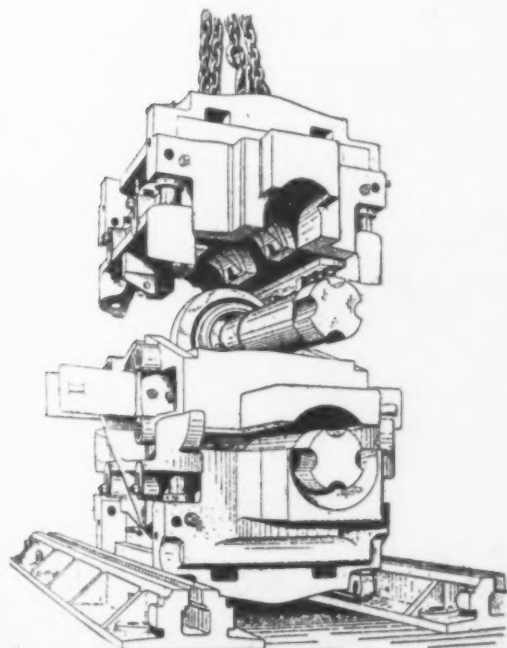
Upper Bearing Plate Being Placed Over Upper Horizontal Roll
